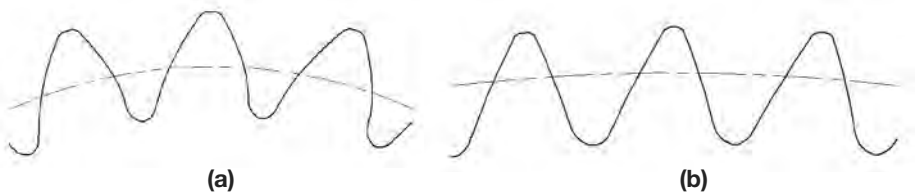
Asymmetric gear tooth profiles; (a)—24-tooth pinion, (b)—83-tooth gear.
